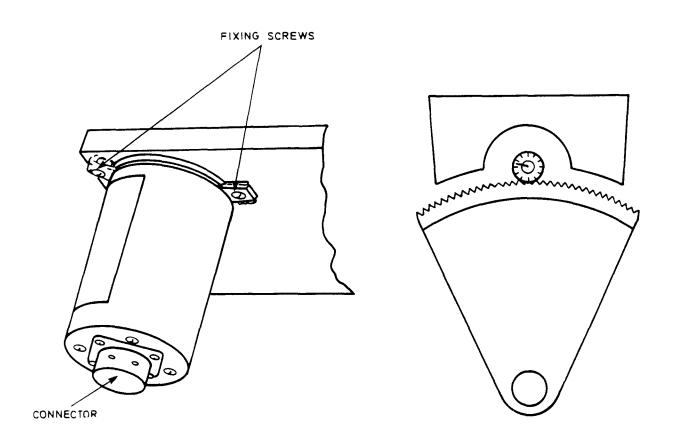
Angle Encoder Gearbox and Quadrant
